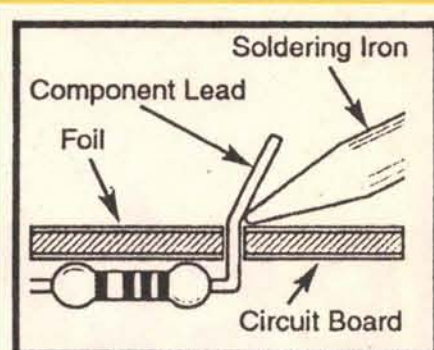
Push the soldering iron tip against both the component lead and the circuit board foil.
